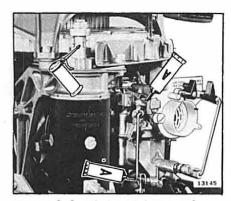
Choke Linkage and Starter Pinion Gear Shaft
